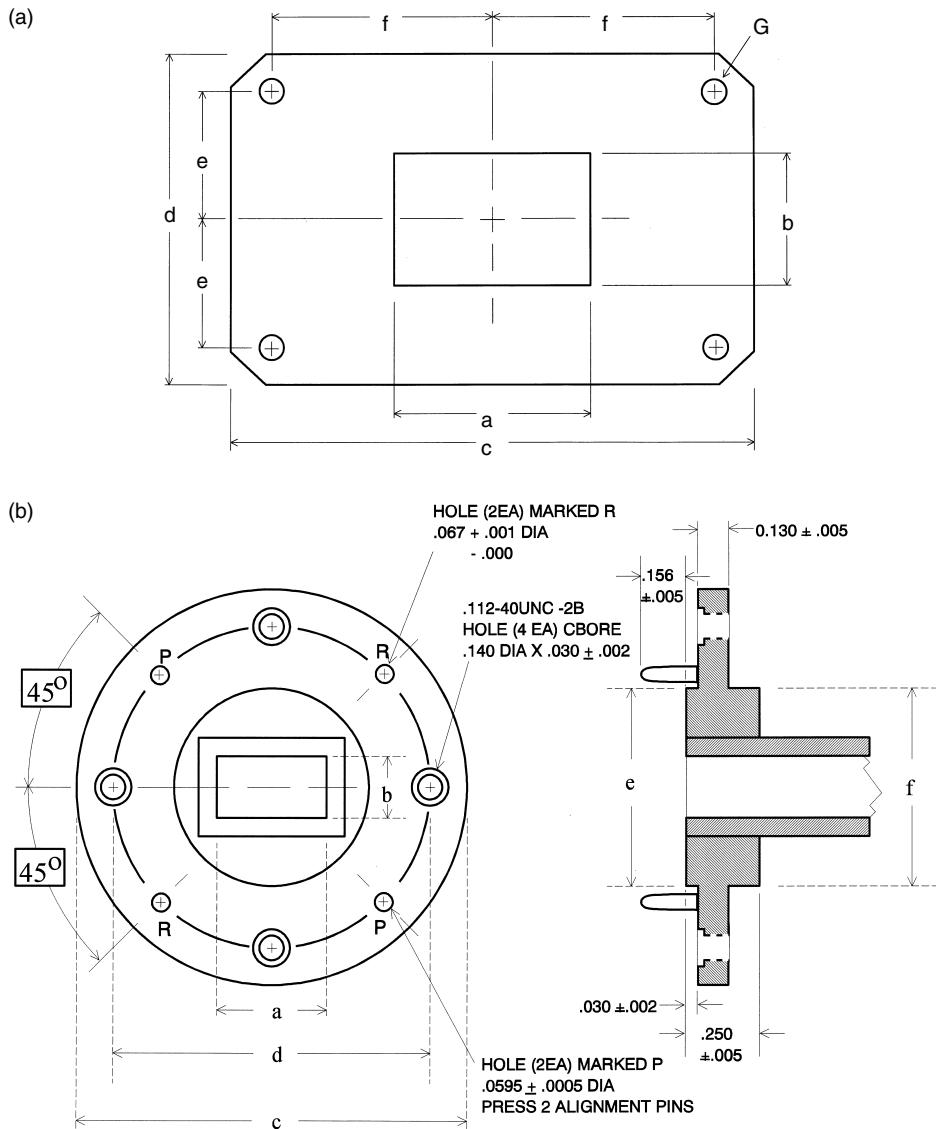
(a) Standard waveguide flange dimensions (rectangular flange); (b) Standard waveguide flange dimensions (circular flange).
